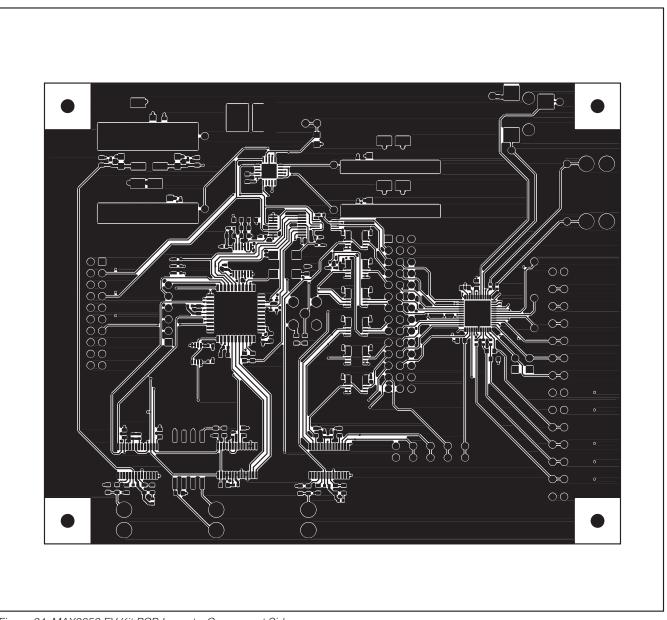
MAX9853 EV Kit PCB Layout—Component Side
